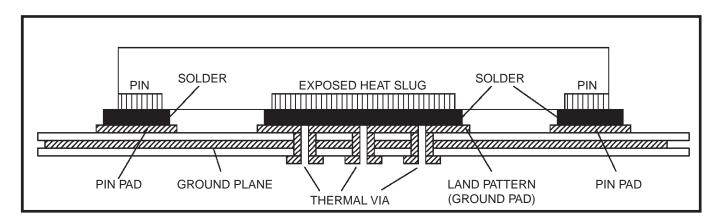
P.C. Assembly for Exposed Pad Thermal Release Path – Side View (drawing not to scale)
